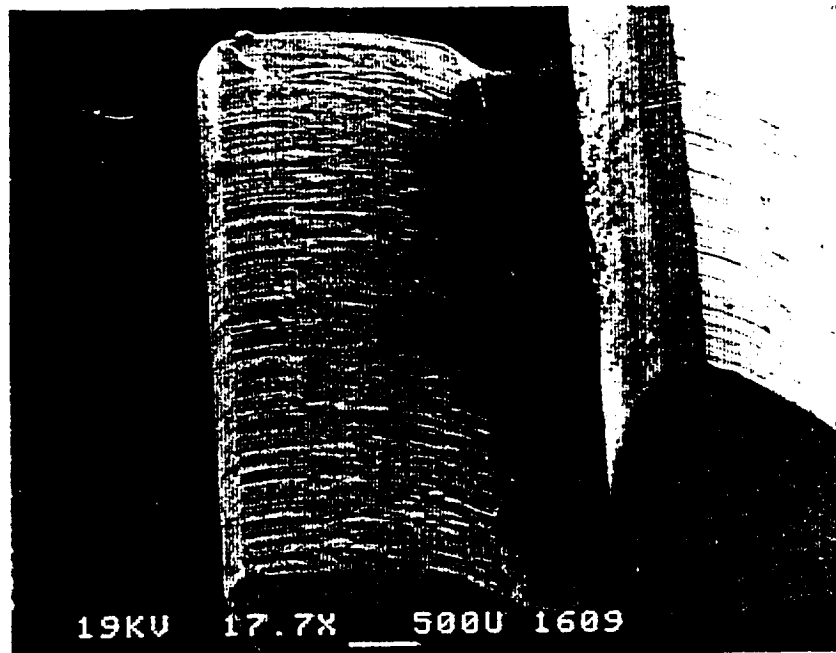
Bottom plate showing scoring at the interface with the 15-5 drive gear.
